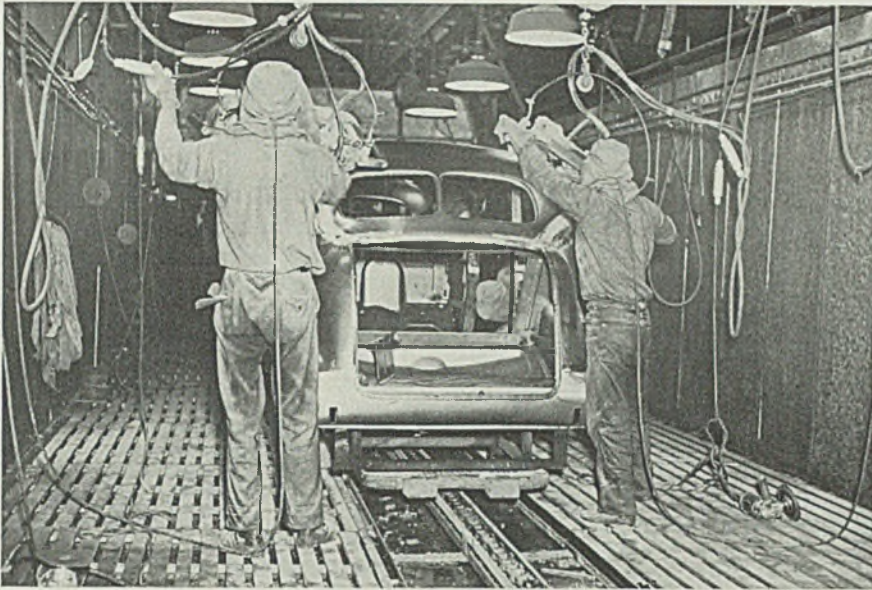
Protective headgear is worn by welders, polishers and other operators whose body finishing work involves danger. The body rests on a buck which is moved along by the conveyor
